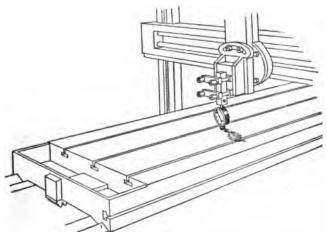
TESTING ALIGNMENT ON PLANER CROSSRAIL
